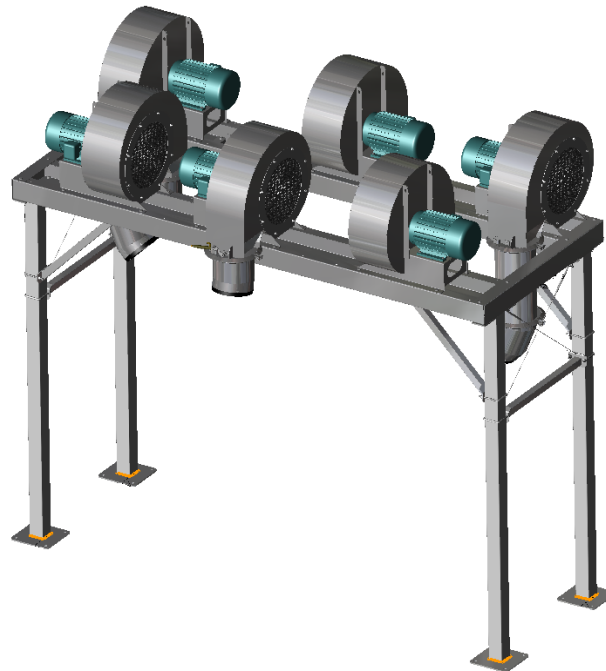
6-Motor Overhead Stainless Steel Blower
